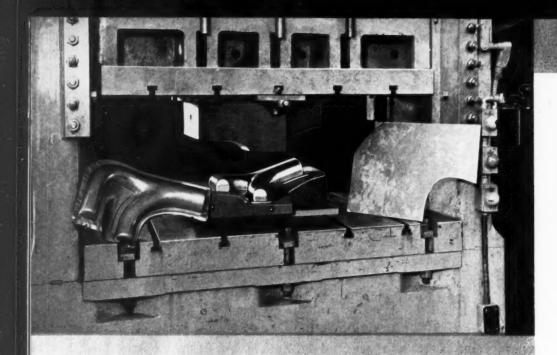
Power Press Provided with Mee hanite Punch, Die, and Blank-holder for Drawing a Complicated Part from Stainless Steel
